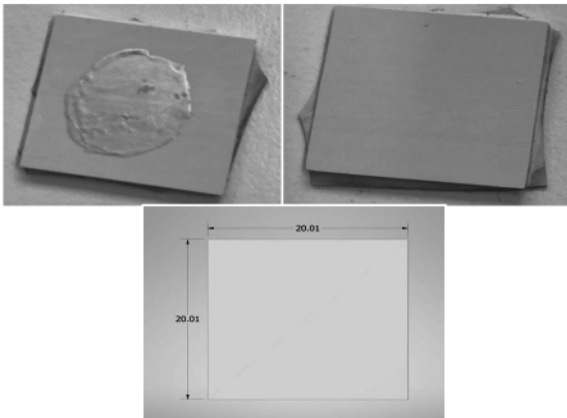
(a). Shows two 3D printed thick films. (b). Shows the CAD file used to print the thick films. The printed samples were flexible, detailed, smooth and fully cured.
